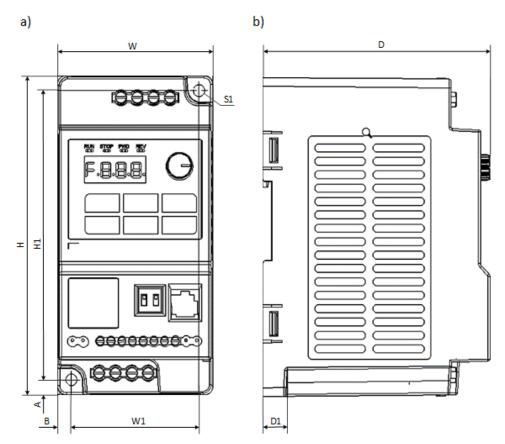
Two-view drawing - FS2: a) Front view b) Side view
